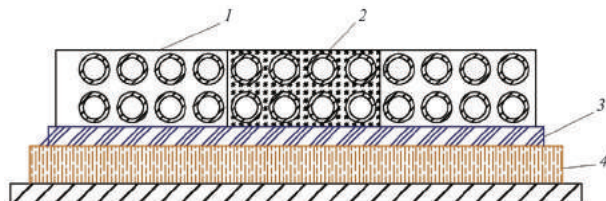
Technology of sealing the core of the radiator engine: 1 — radiator; 2 — the expected place of the leak is filled with a formative adhesive composition; 3 — rubber strip lubricated with a thin layer of oil; 4 — wooden stand
